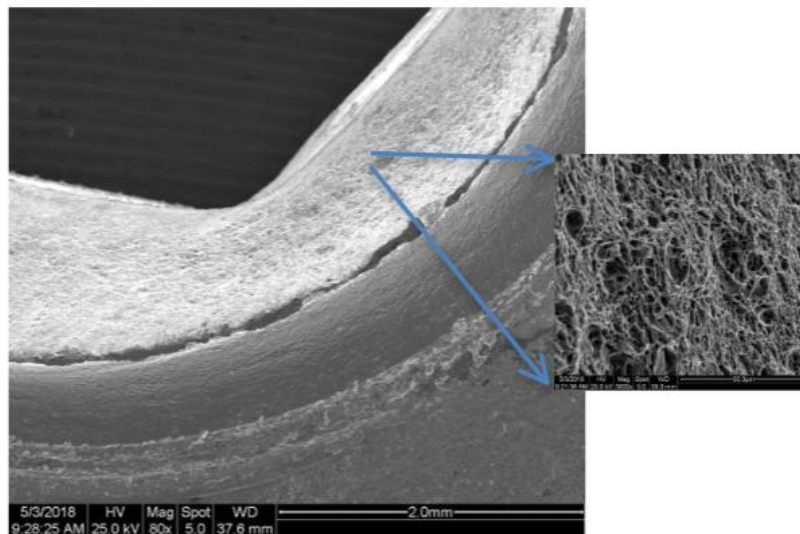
SEM picture of fracture surface of bolt No. 1; insert showing dimples indicating a ductile overload
